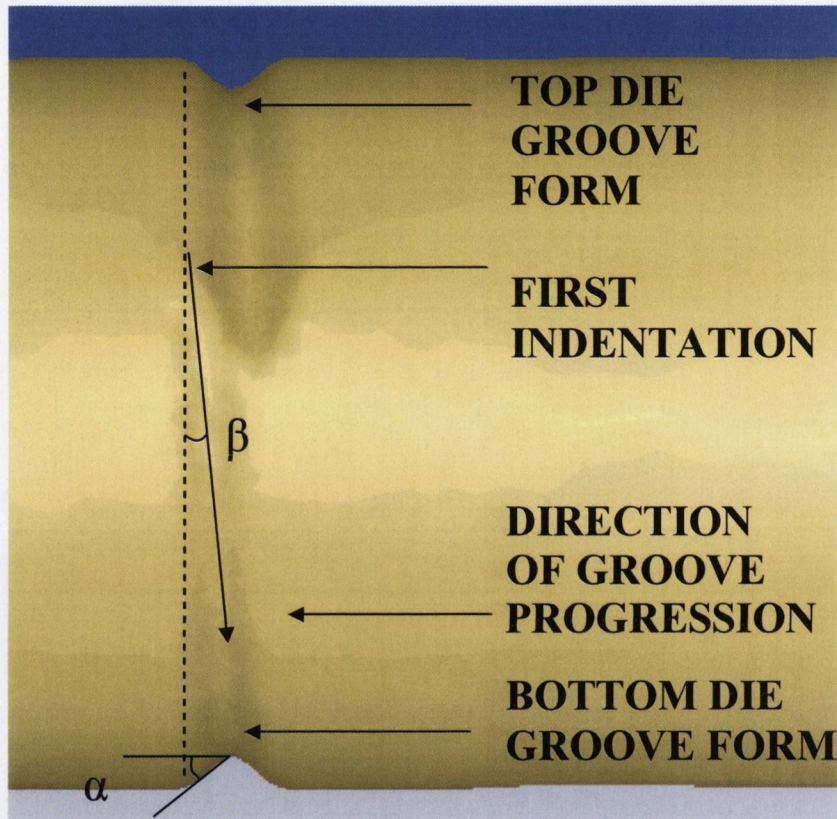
Form Rolled groove features through 180° rotation of the workpiece.
